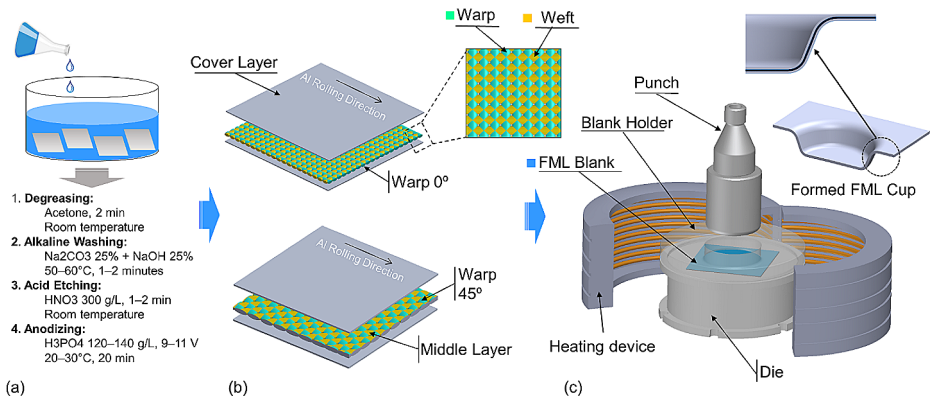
Experiment set-up, (a) aluminum surface treatment, (b) 2/1 FMLs lay-up, (c) thermo-stamping mold
